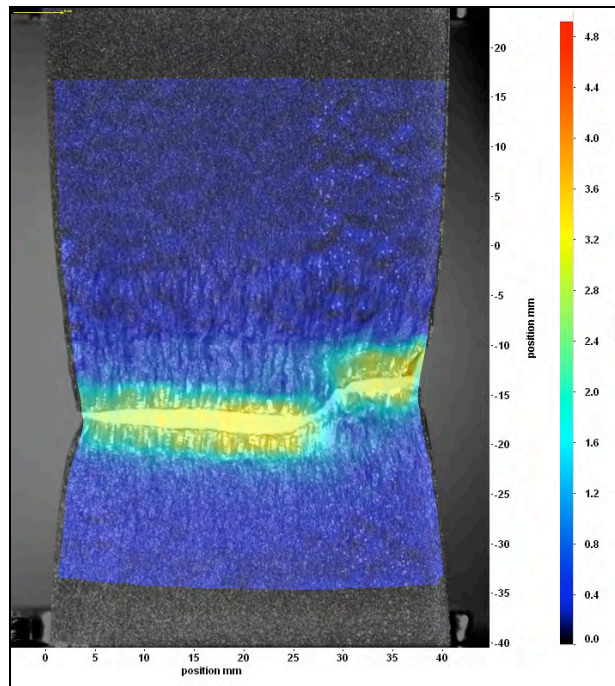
Strain map of an EB weld. Tube material is on the top and lid material on the bottom. Deformation localizes to the middle of the weld with large grain size as well as between the weld and the forged lid material due to large grain size gradient. It can also be seen that the extruded tube material is elongated much more than the forged lid material.
